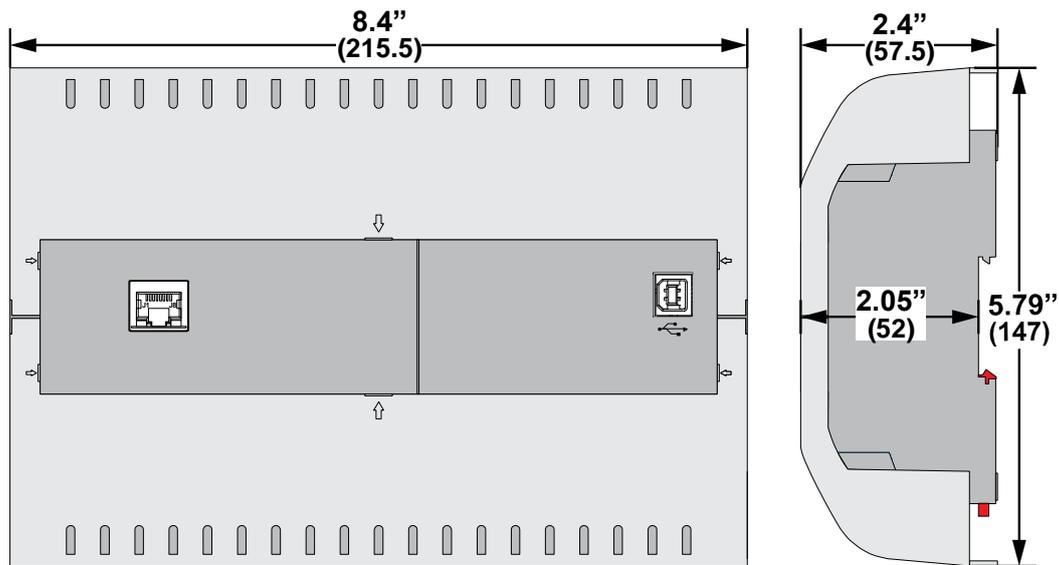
CIPer Model 50 controller with covers, dimensions in inches (mm)
